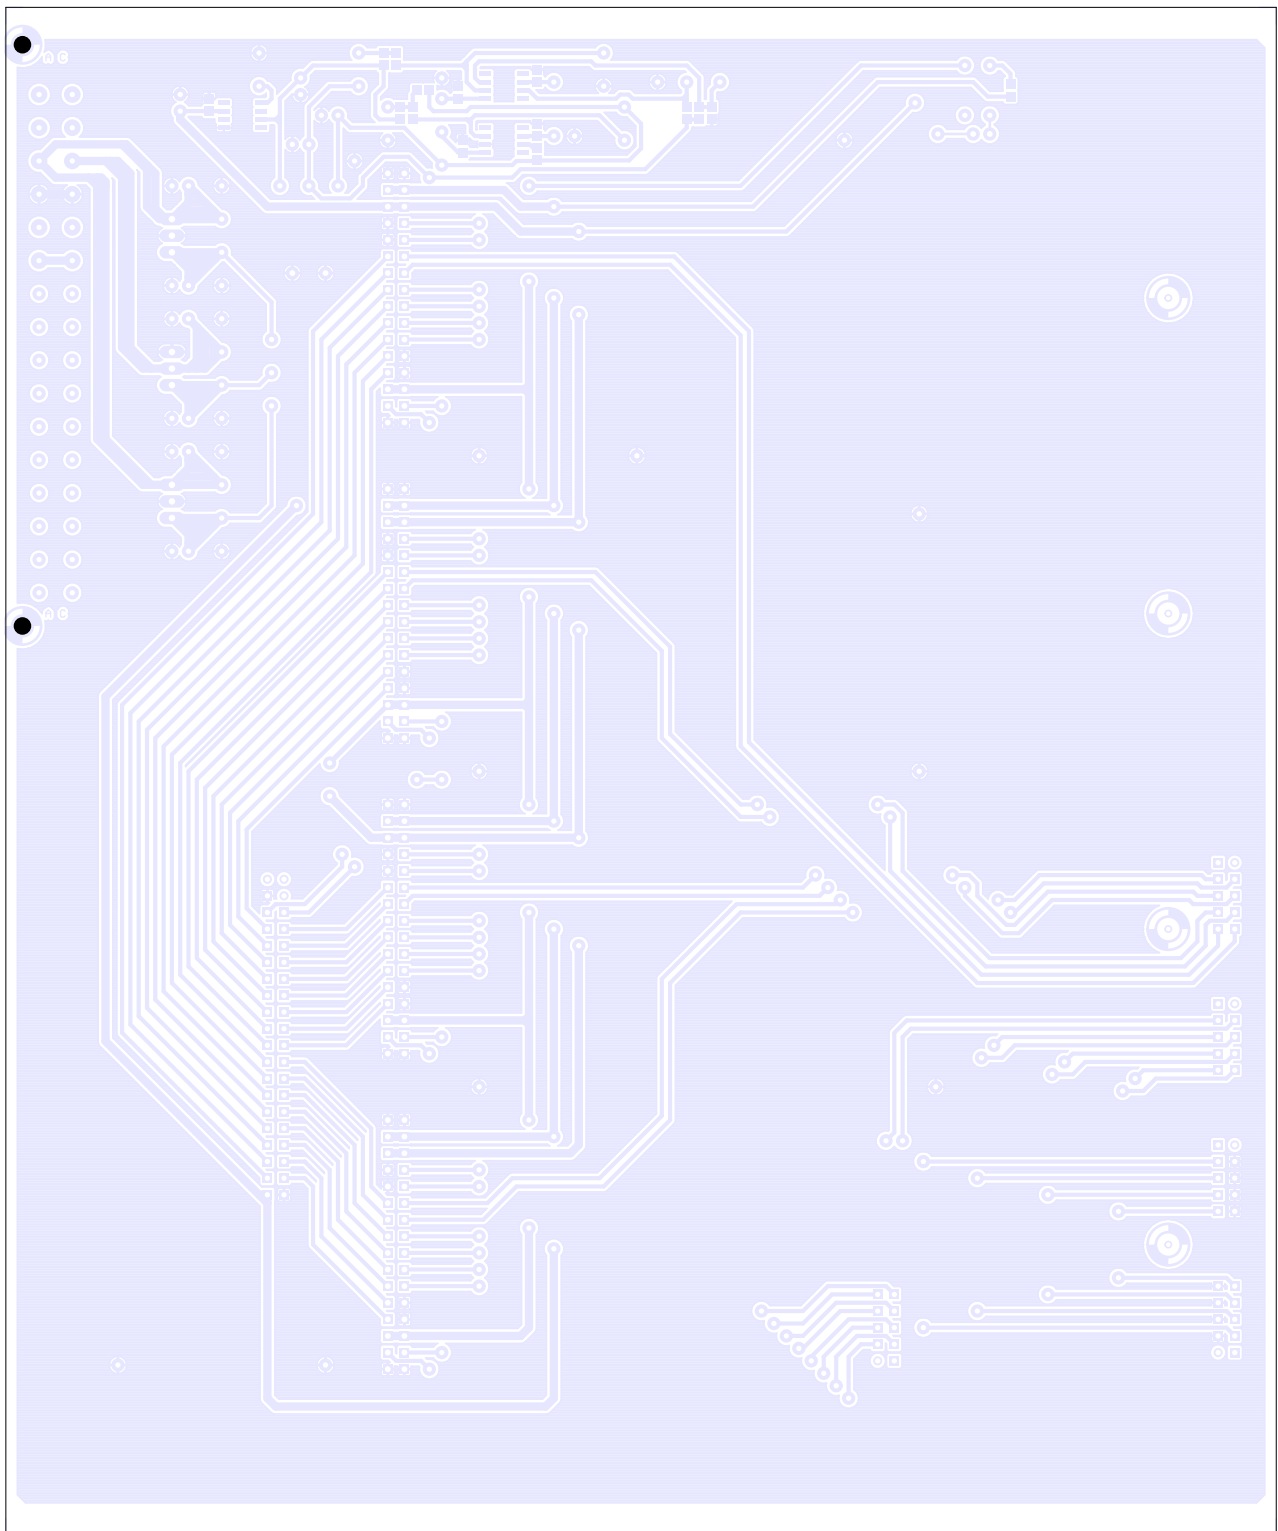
Board bottom view showing drills with ≈ 2.7 mm (≈ 0.1063 in) diameter
